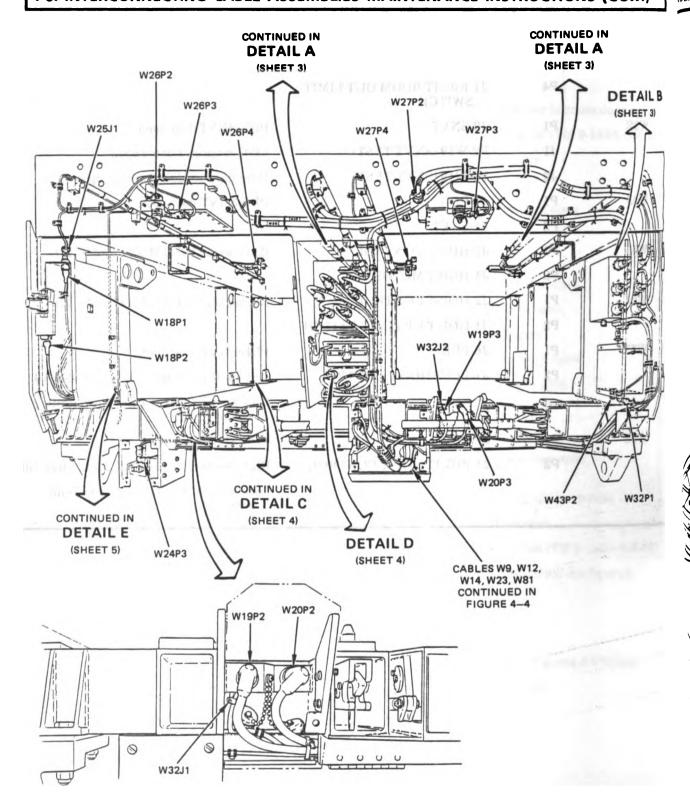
Cage Interconnecting Cable Assemblies (Sheet 1 of 5)
